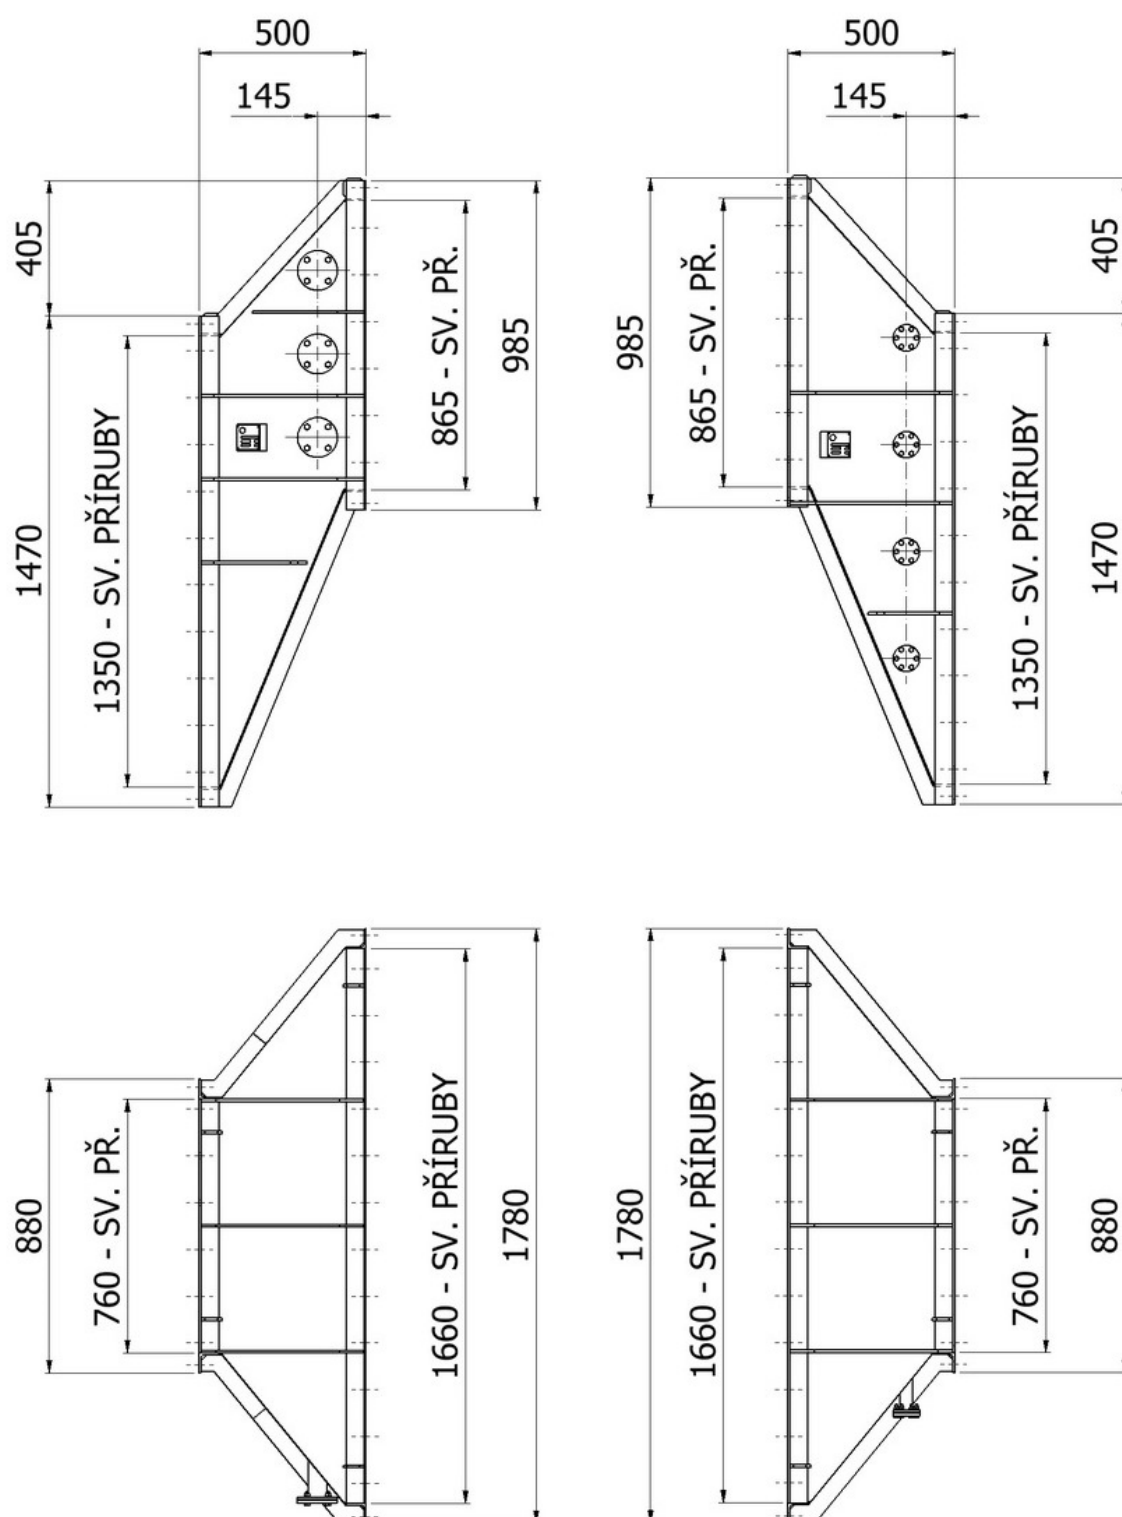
Main dimensions of the VSS 8 connecting parts, solid right-hand model
